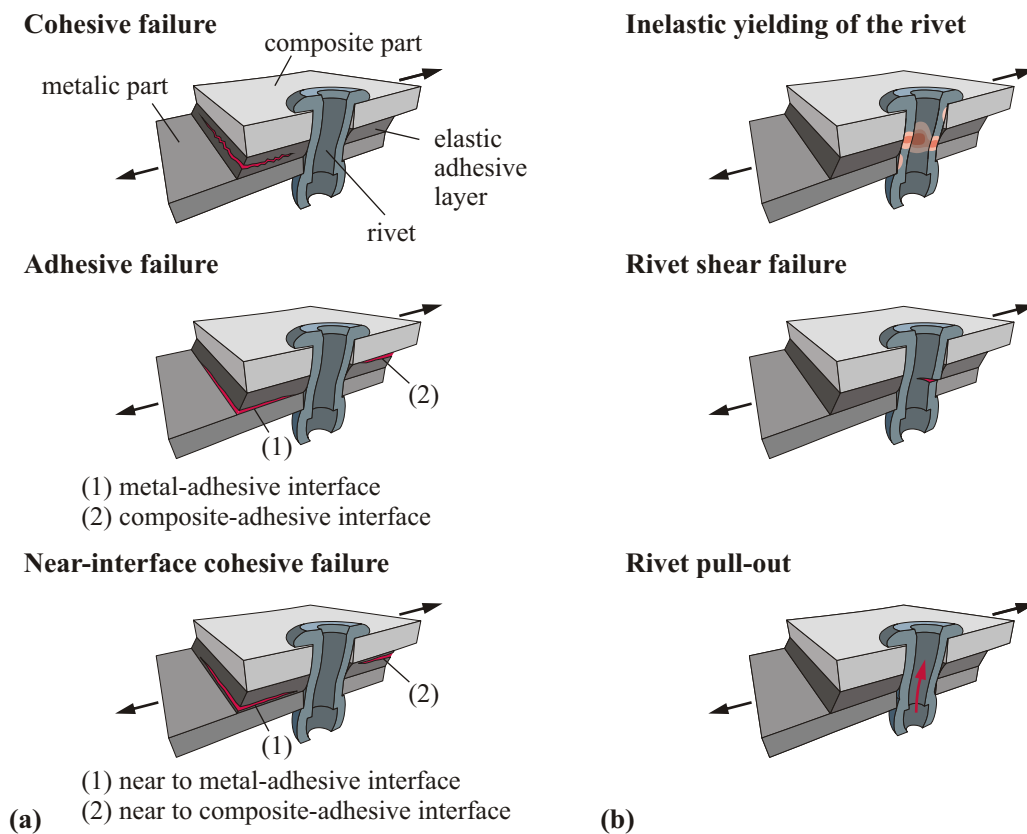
Typical adhesive (a) and rivet (b) failure modes of adhesively bonded riveted joints
